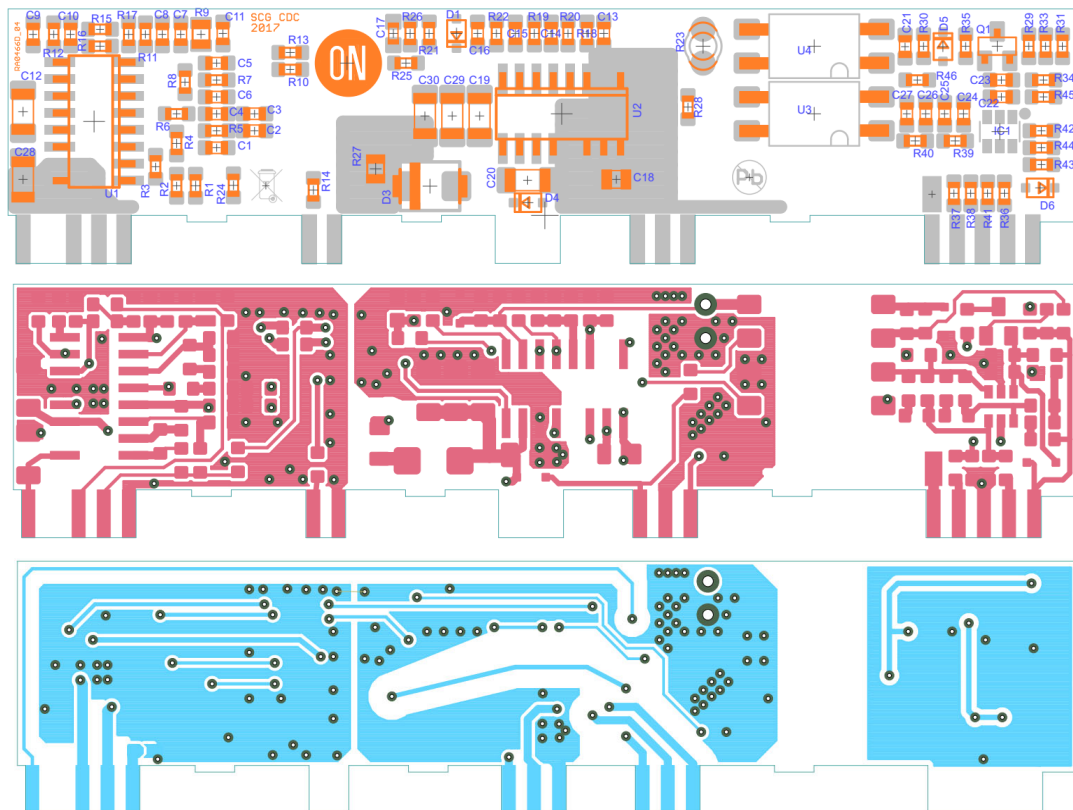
Control Module – Top Side Components, Top Layer – Red, Bottom Layer – Blue
